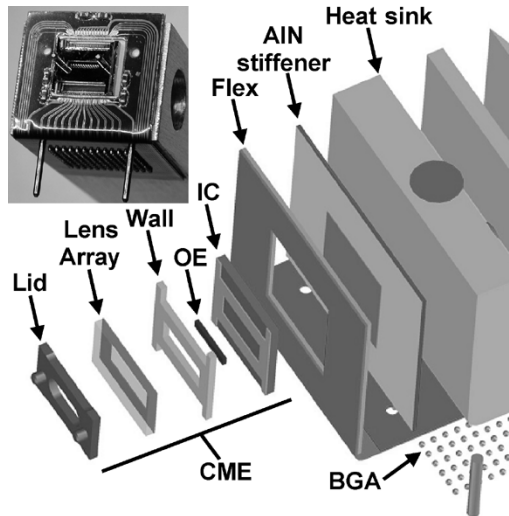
Exploded view of the POSH module showing CME with an inset showing a photograph of a functional POSH RX module.
